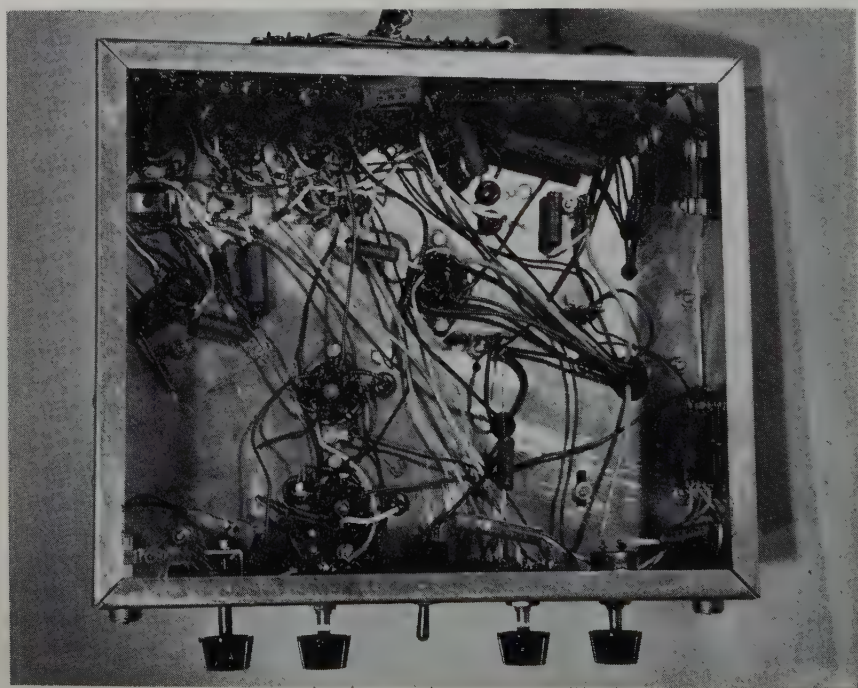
(b). Bottom view of receiver packaged using the circuit grouping method.
